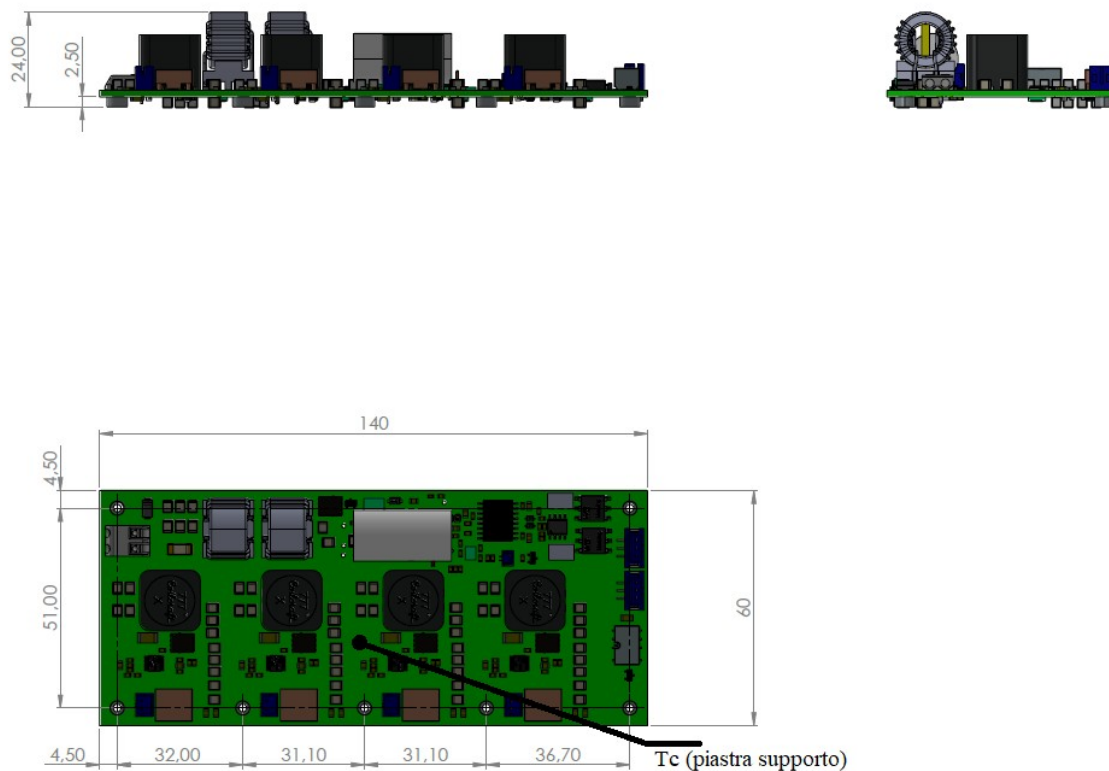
Dimensions (mm) / Dimensioni (mm)
